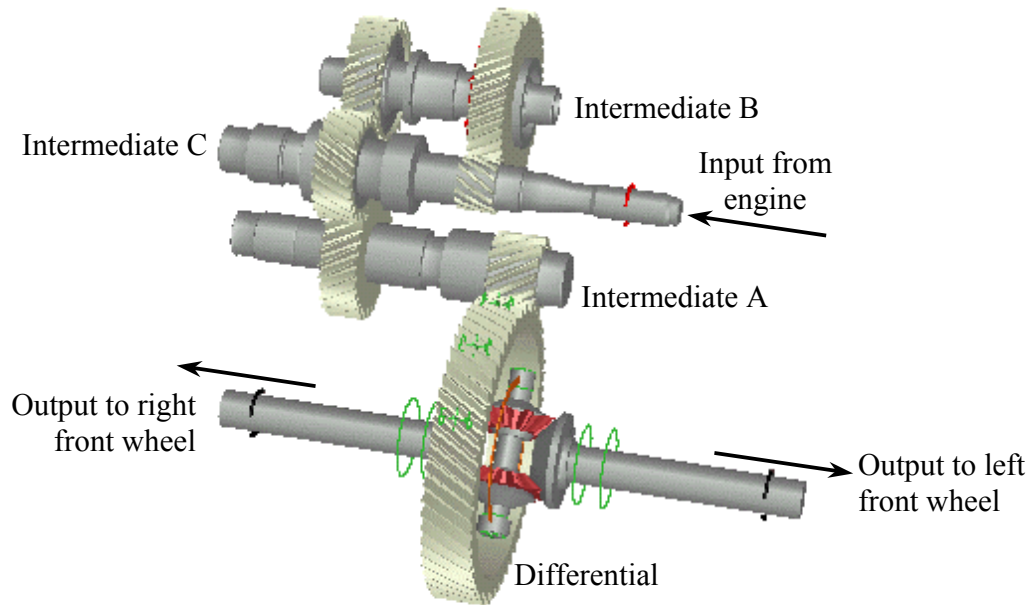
First speed loaded gears for alternative 5-speed gearbox layout, adapted from (James 2003)
